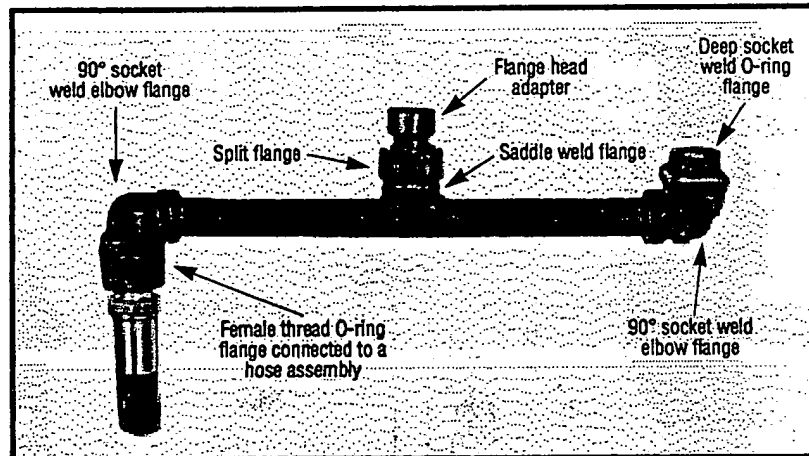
Weir-type fittings used in conjunction with SAE 4-bolt flange clamp halves and O-ring flange head couplings offer convenience, economy for hydraulic connection assemblies.
